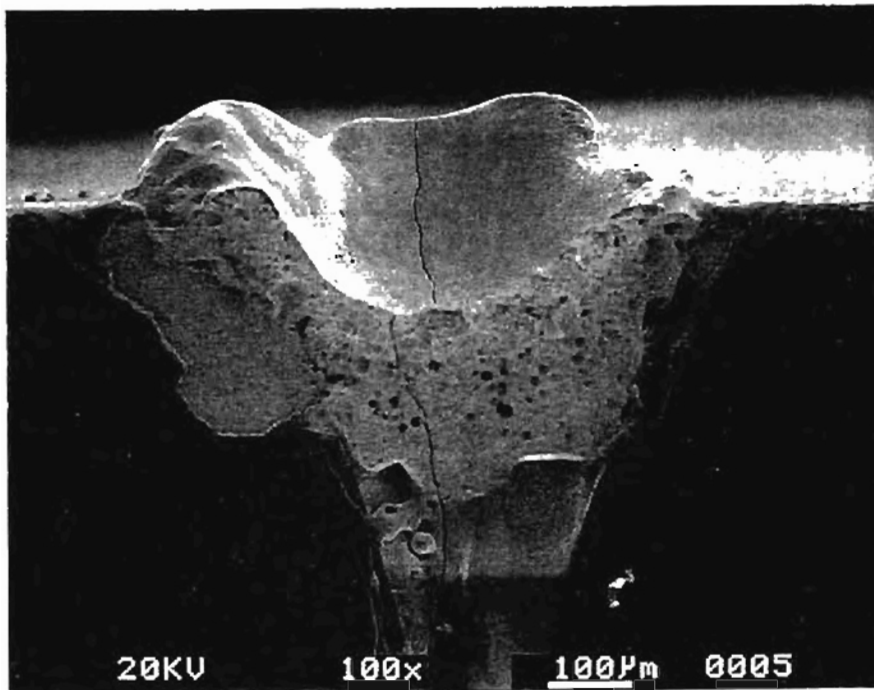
b) Laser Drilled Hole at High Power in Multi Coated Tool
